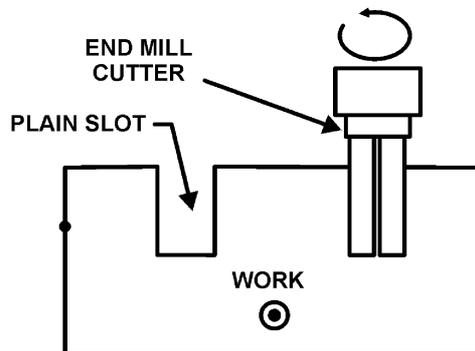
, Milling a plain slot by means of an End Mill Cutter.
